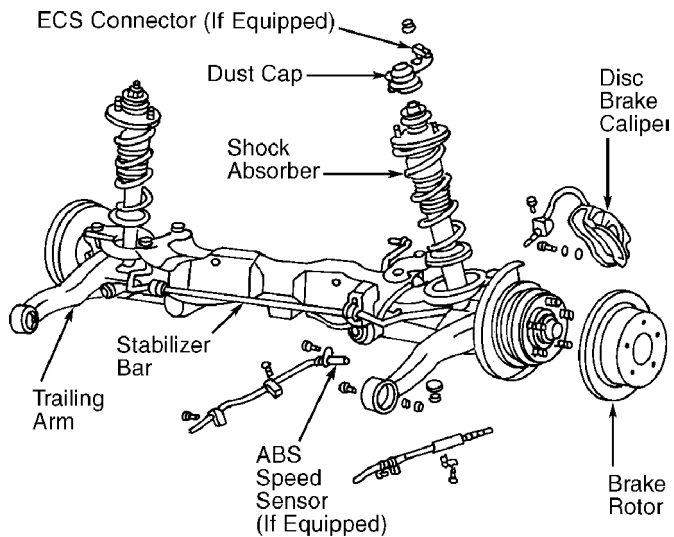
Exploded View Of Rear Suspension (Diamante, Stealth FWD & 3000GT FWD)
